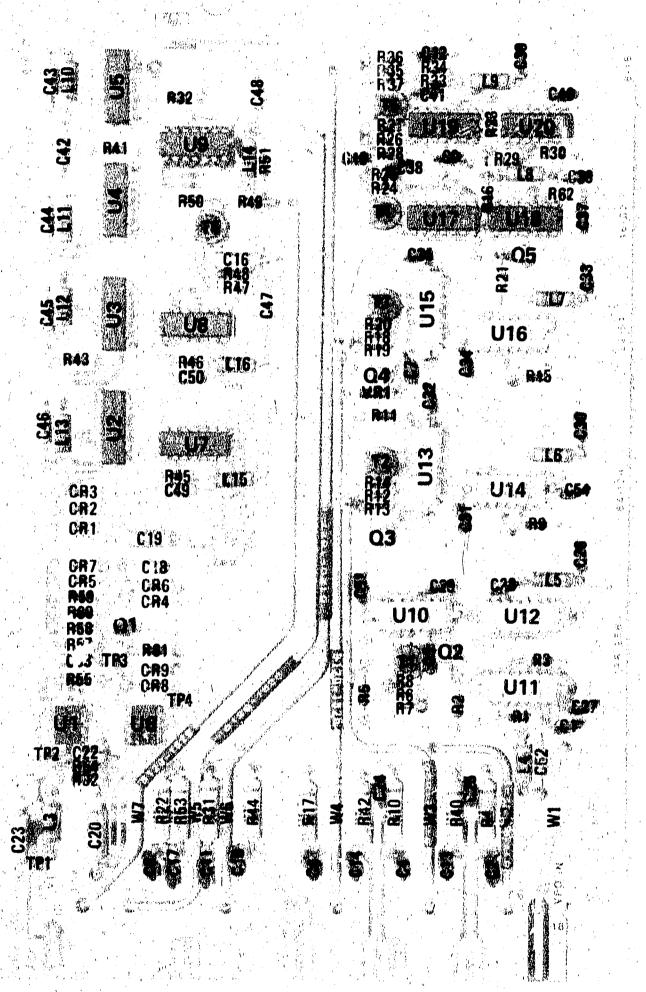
A10A2 RF Divider Assembly Component Locations
